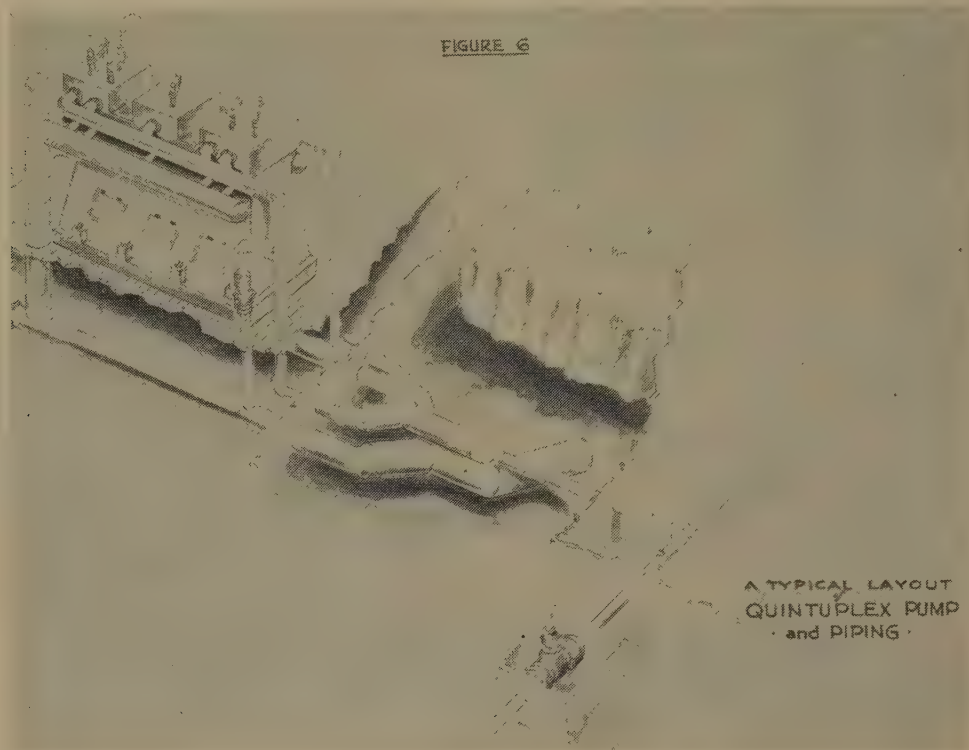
TYPICAL LAYOUT OF QUINTUPLEX PUMP AND PIPING
